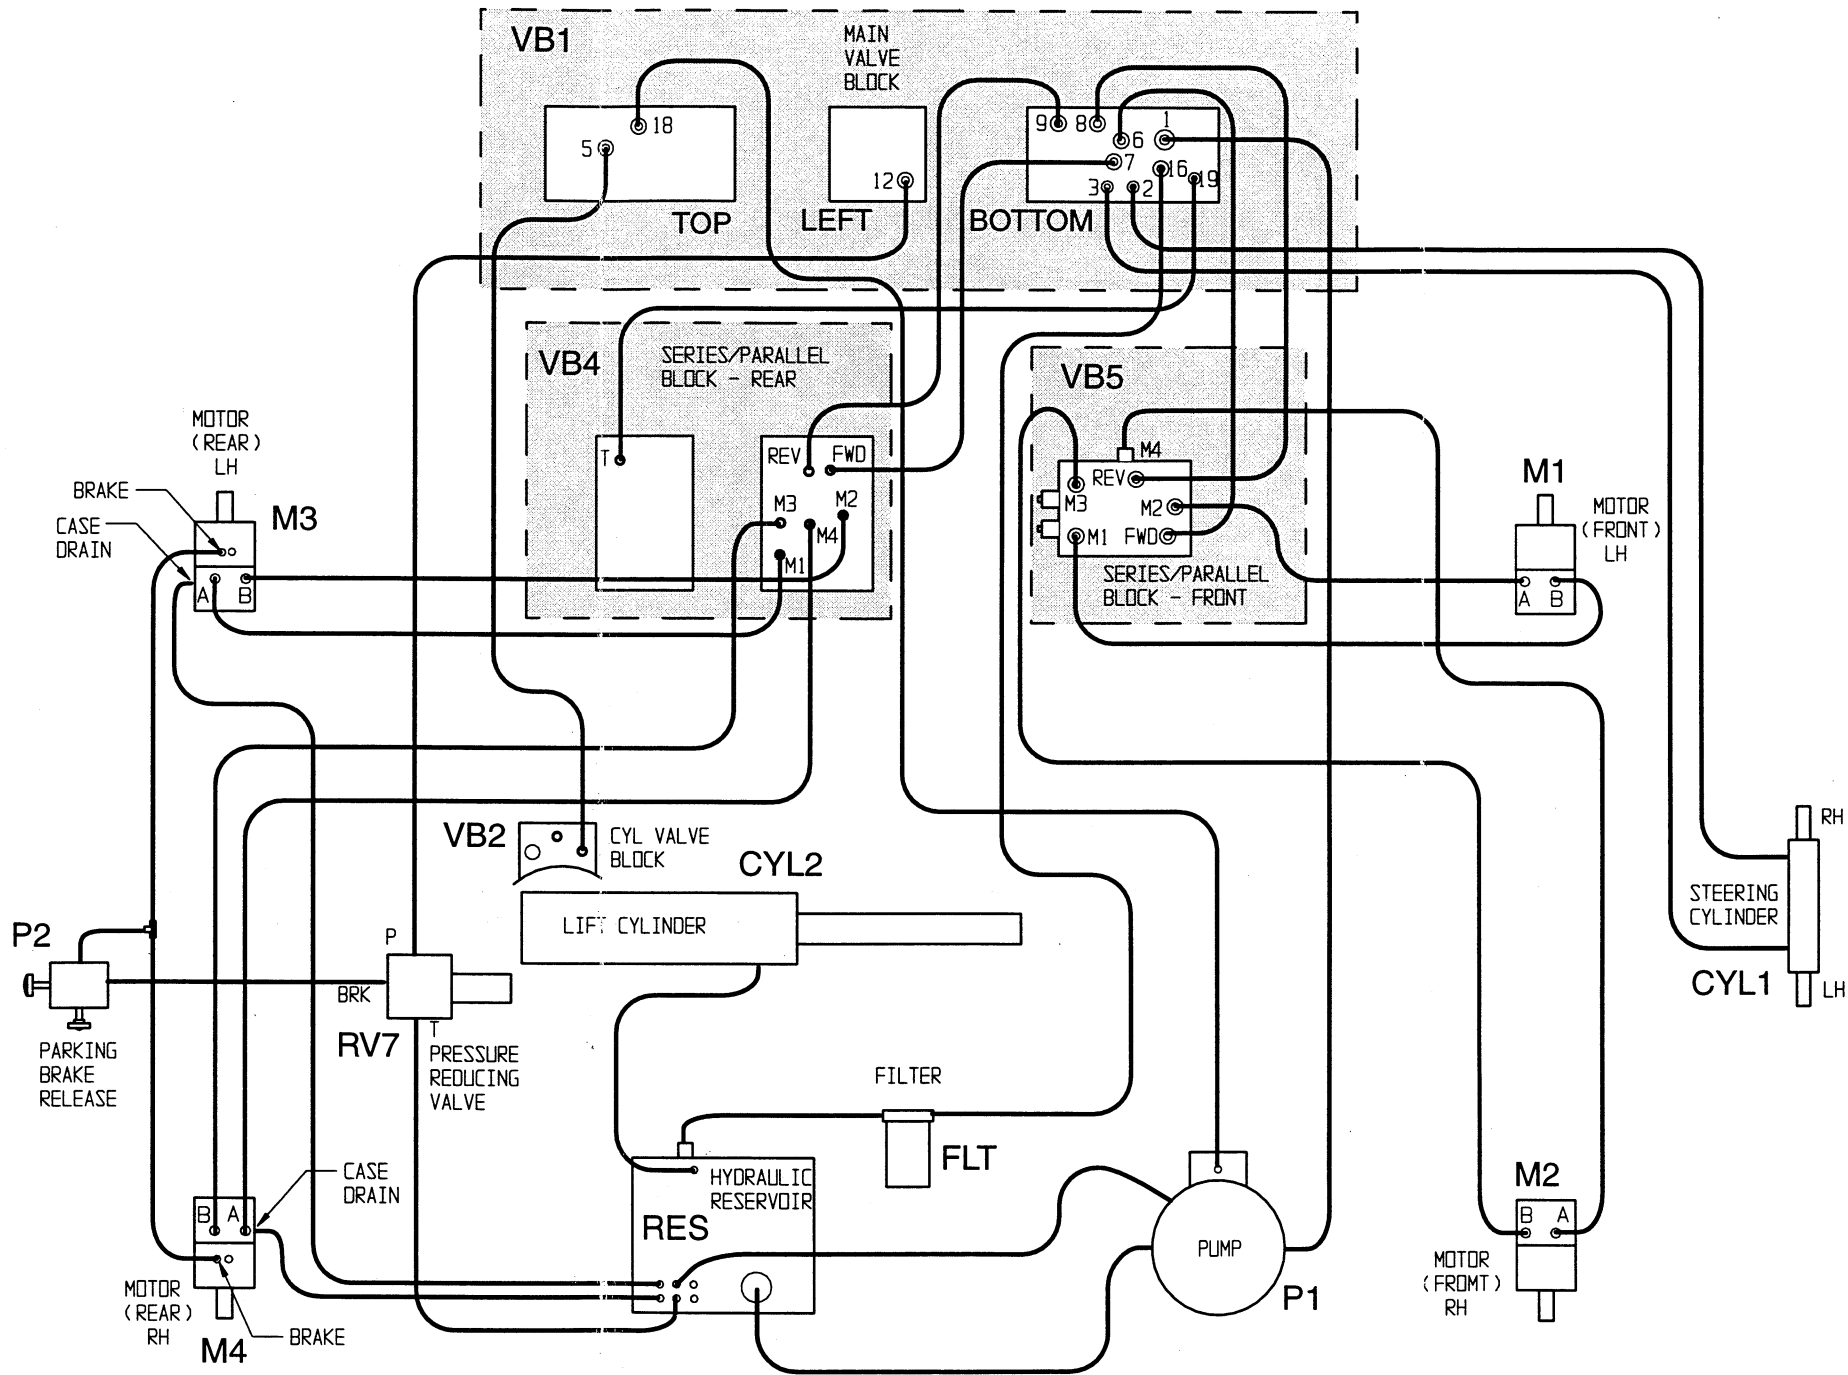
Hose Routing, XRT27 4-Wheel Drive
